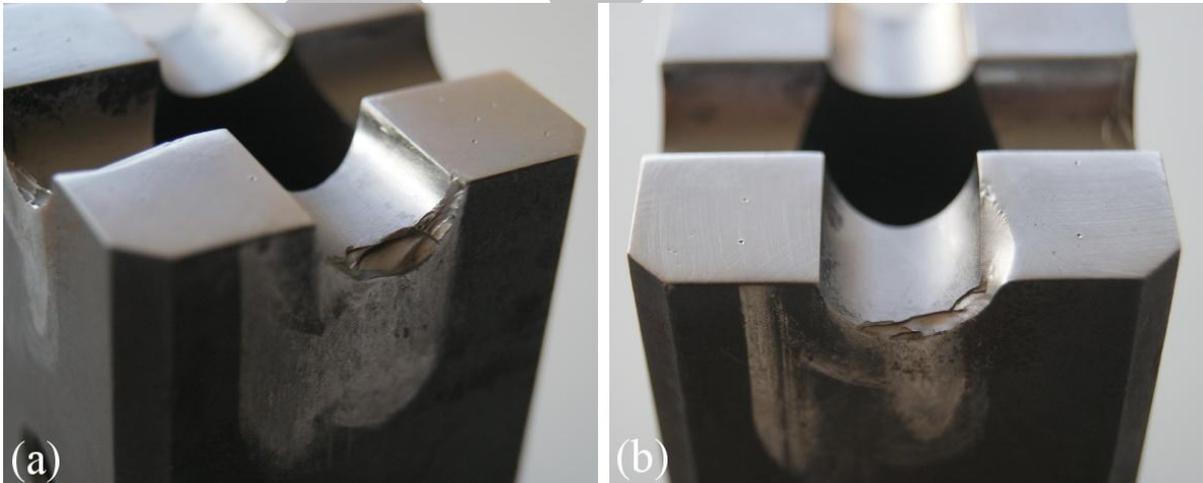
Detail of the dies; fracture of the cutting edges: (a) Piece I, (b) Piece II.
